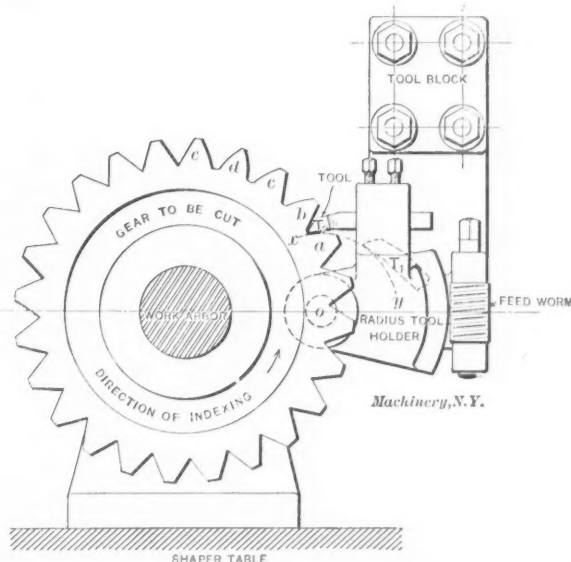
The Odontographic Principle, which approximately outlines the Tooth Form by Mechanical Means.
